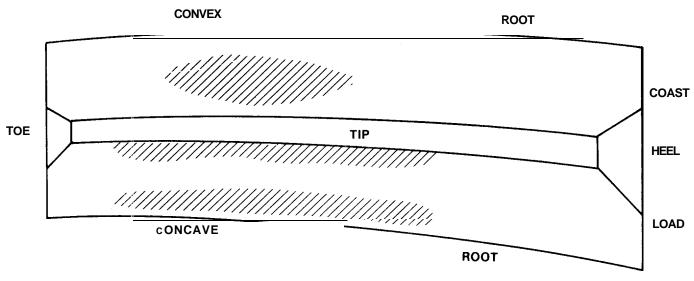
Tooth Contact Pattern: Port Upper Gears, at 268 Hours of Operation
